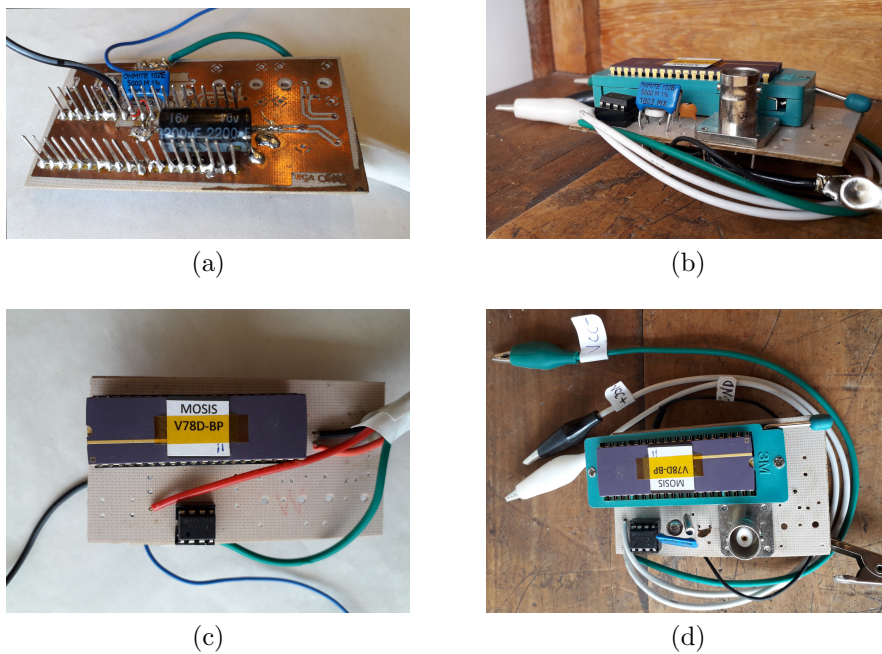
PCBs to experimentally characterize circuits A and B. (a) bottom view of PCB A, (b) lateral view of PCB B, (c) top view of PCB A, and (d) top view of PCB B.
